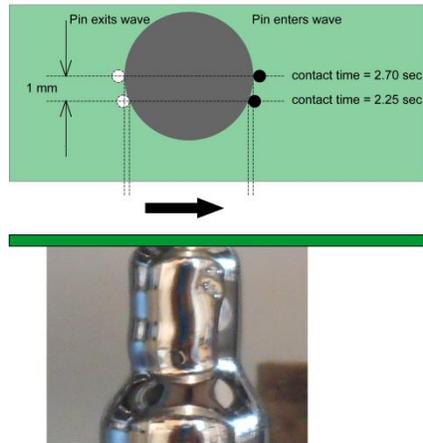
The impact of soldering out of center: shorter contact time for the pins.
